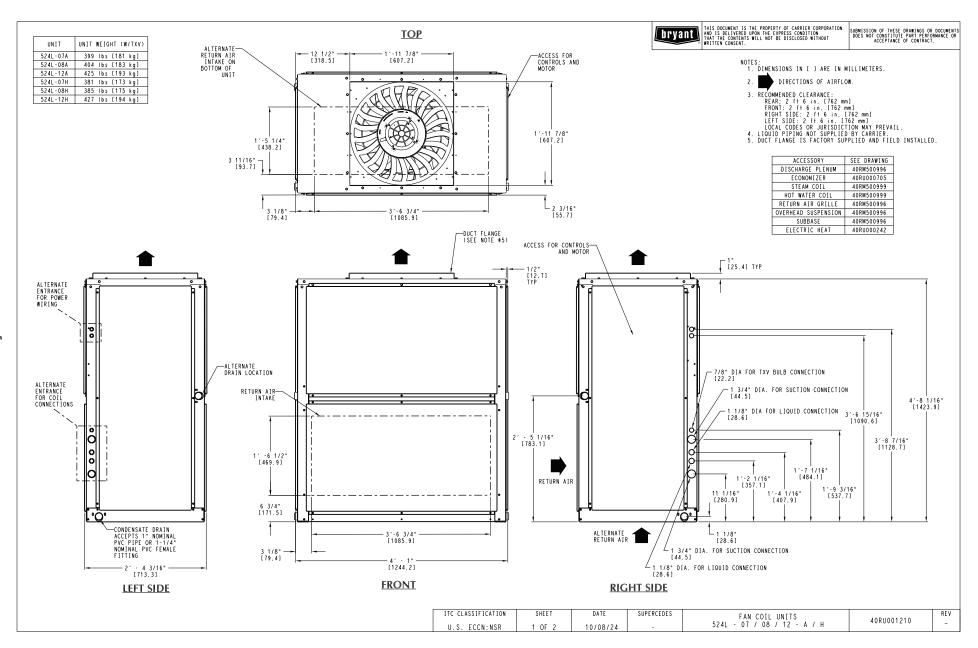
524L\*07-12 Base Unit Dimensions
